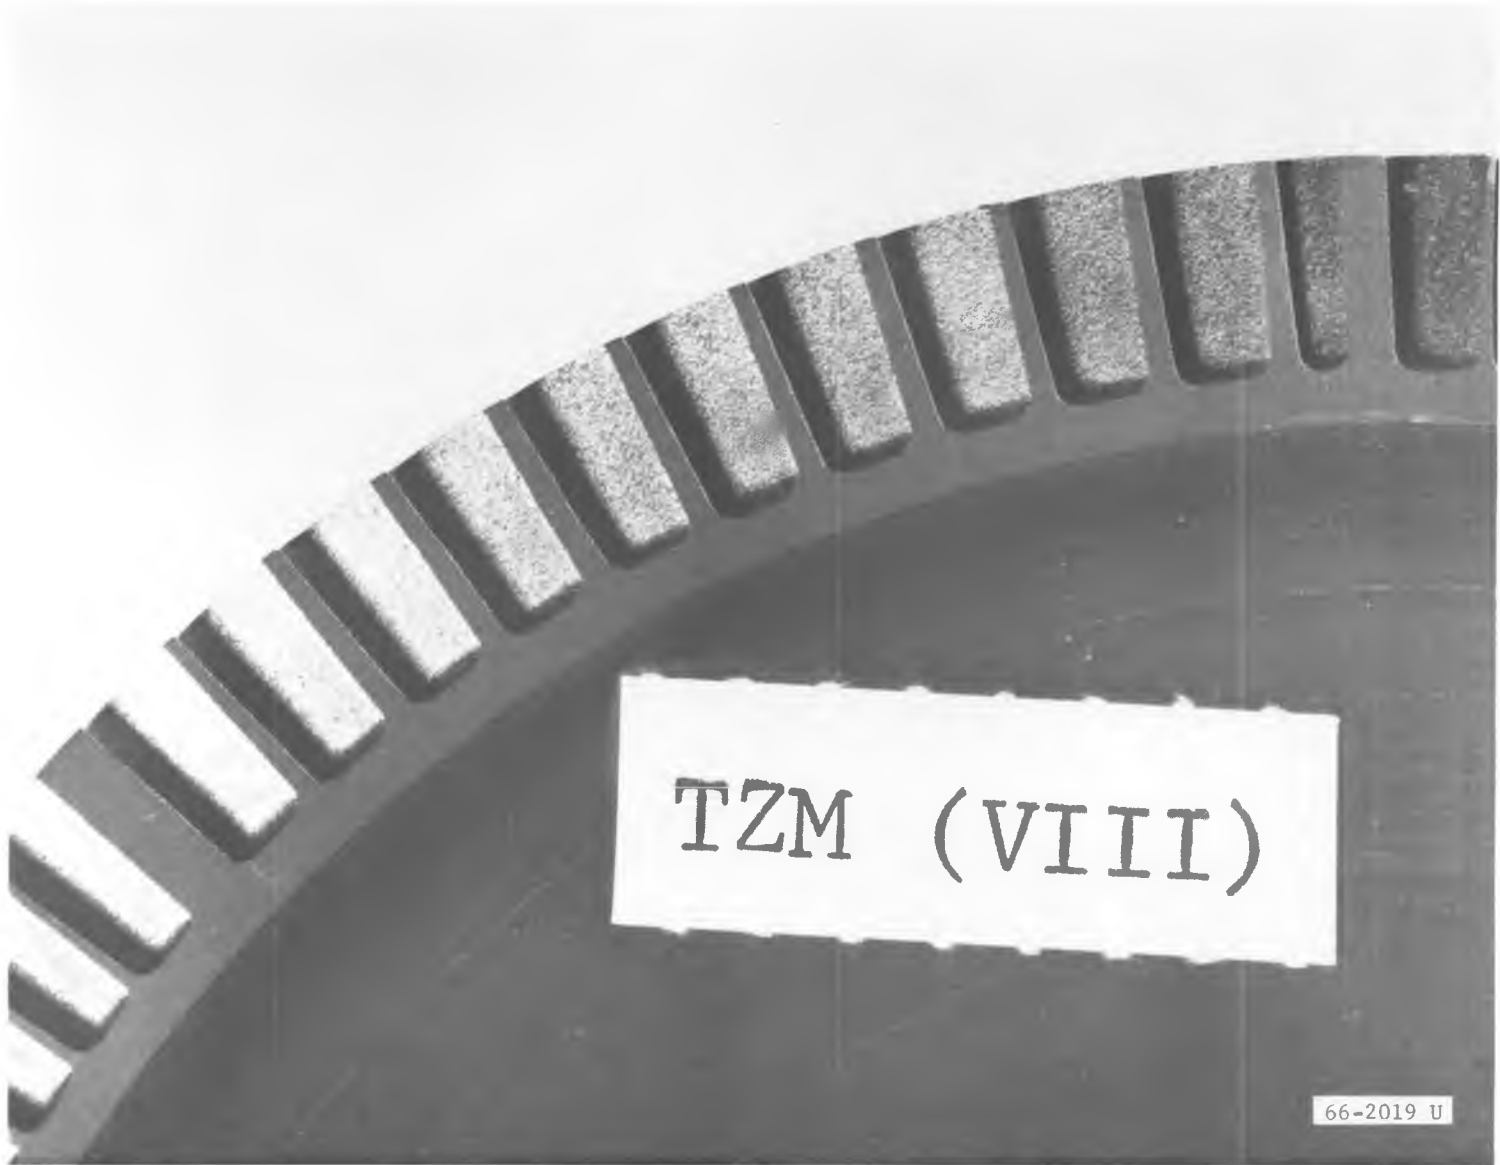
TYPICAL APPEARANCE OF TURBINE BLADES BEFORE TESTING
